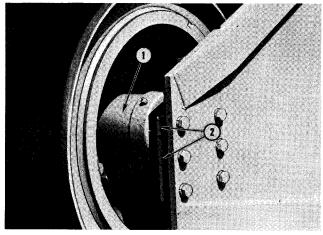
WHEEL AND AXLE 1. Axle Hub 2. Axle Blocks
